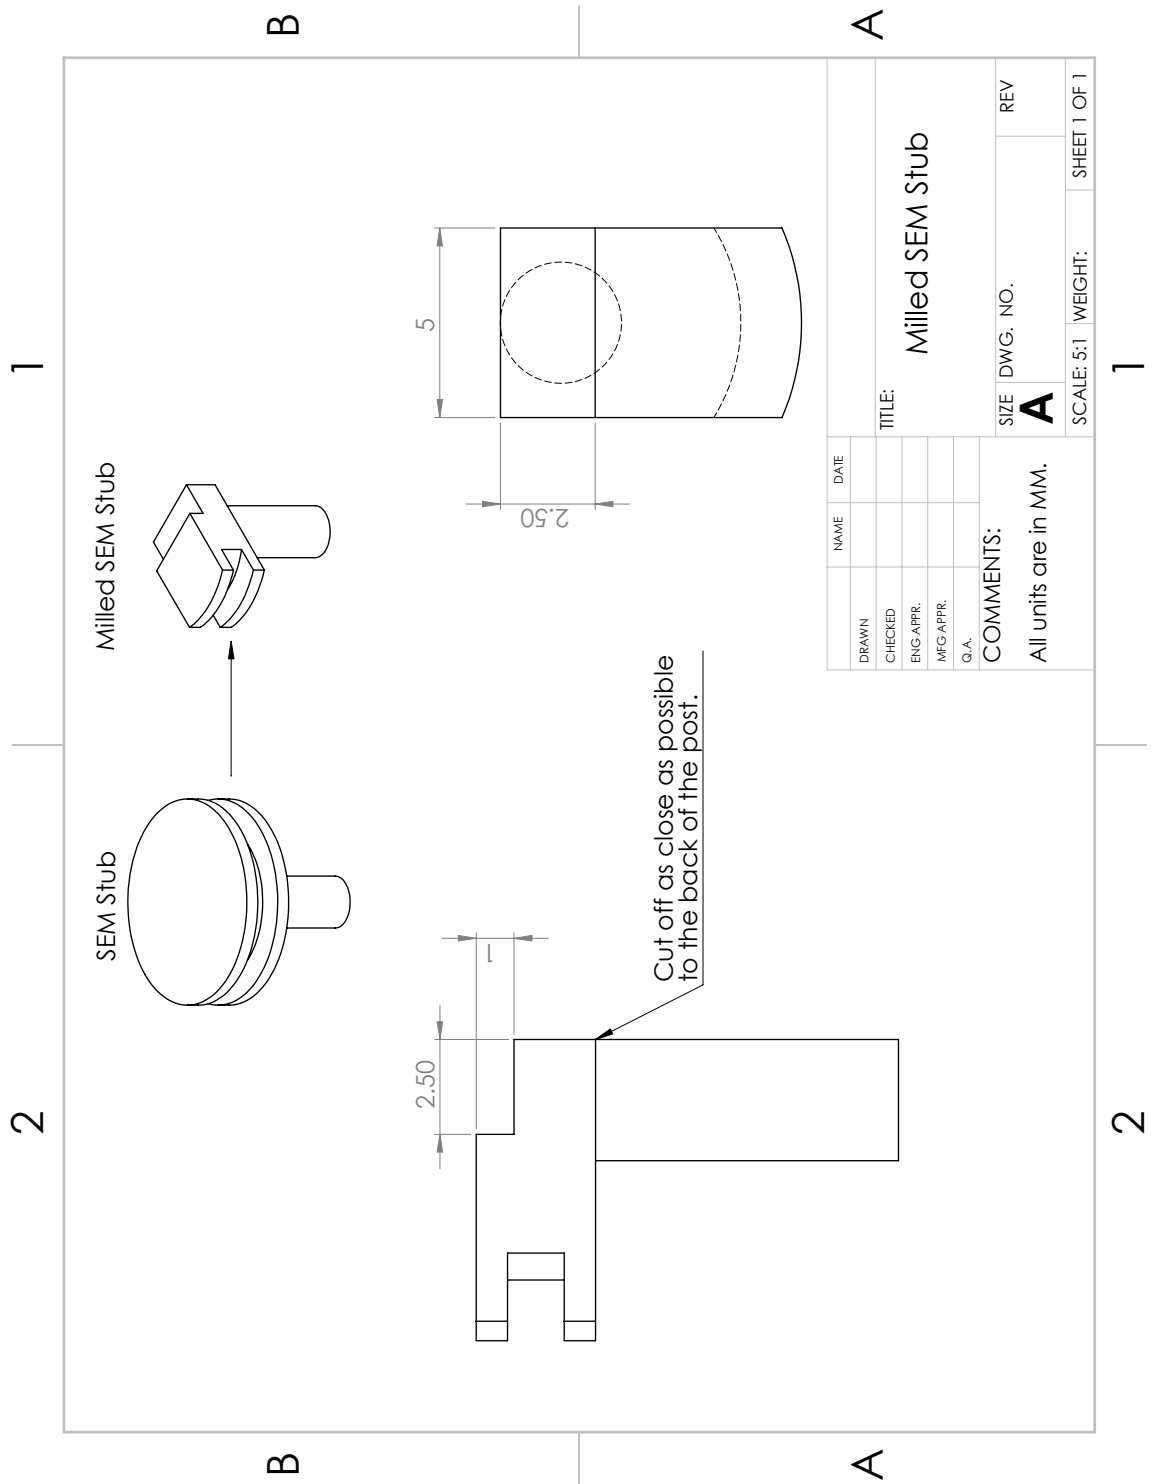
Mechanical drawing for the milled SEM stub sample holder.
